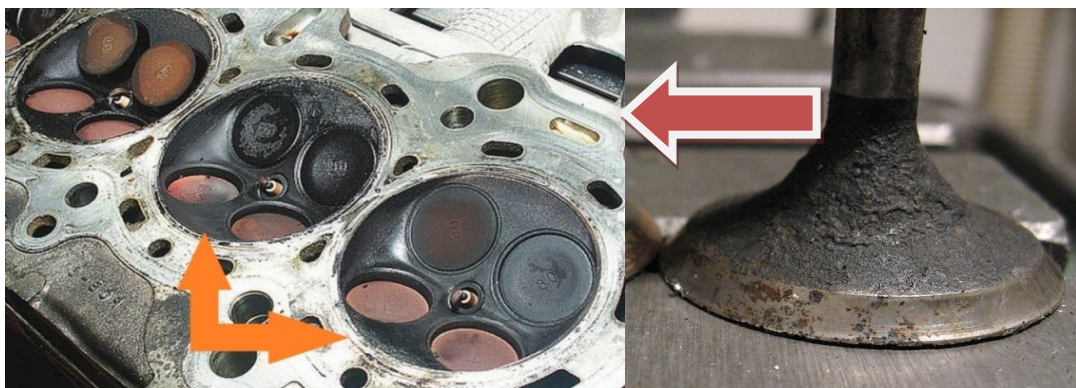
Valve recessing during operation on gas (left) occurs due to intense wear of the seat and valve chamfer (right) [1, 3]
